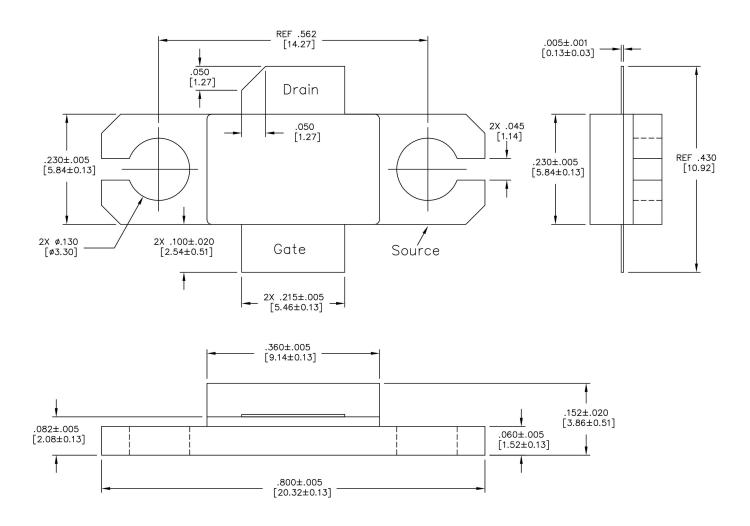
AC360B-2 Metal-Ceramic Package Dimensions (all dimensions in inches [millimeters])
